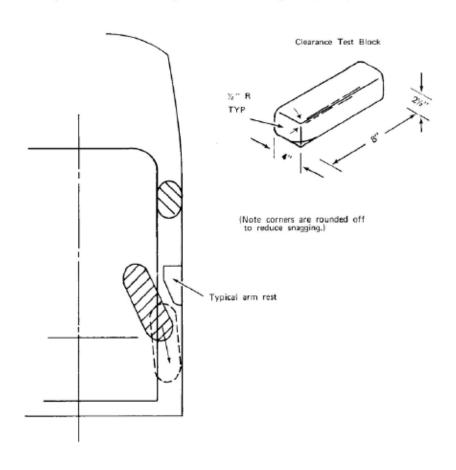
USE OF CLEARANCE TEST BLOCK TO DETERMINE HAND/ARM ACCESS
